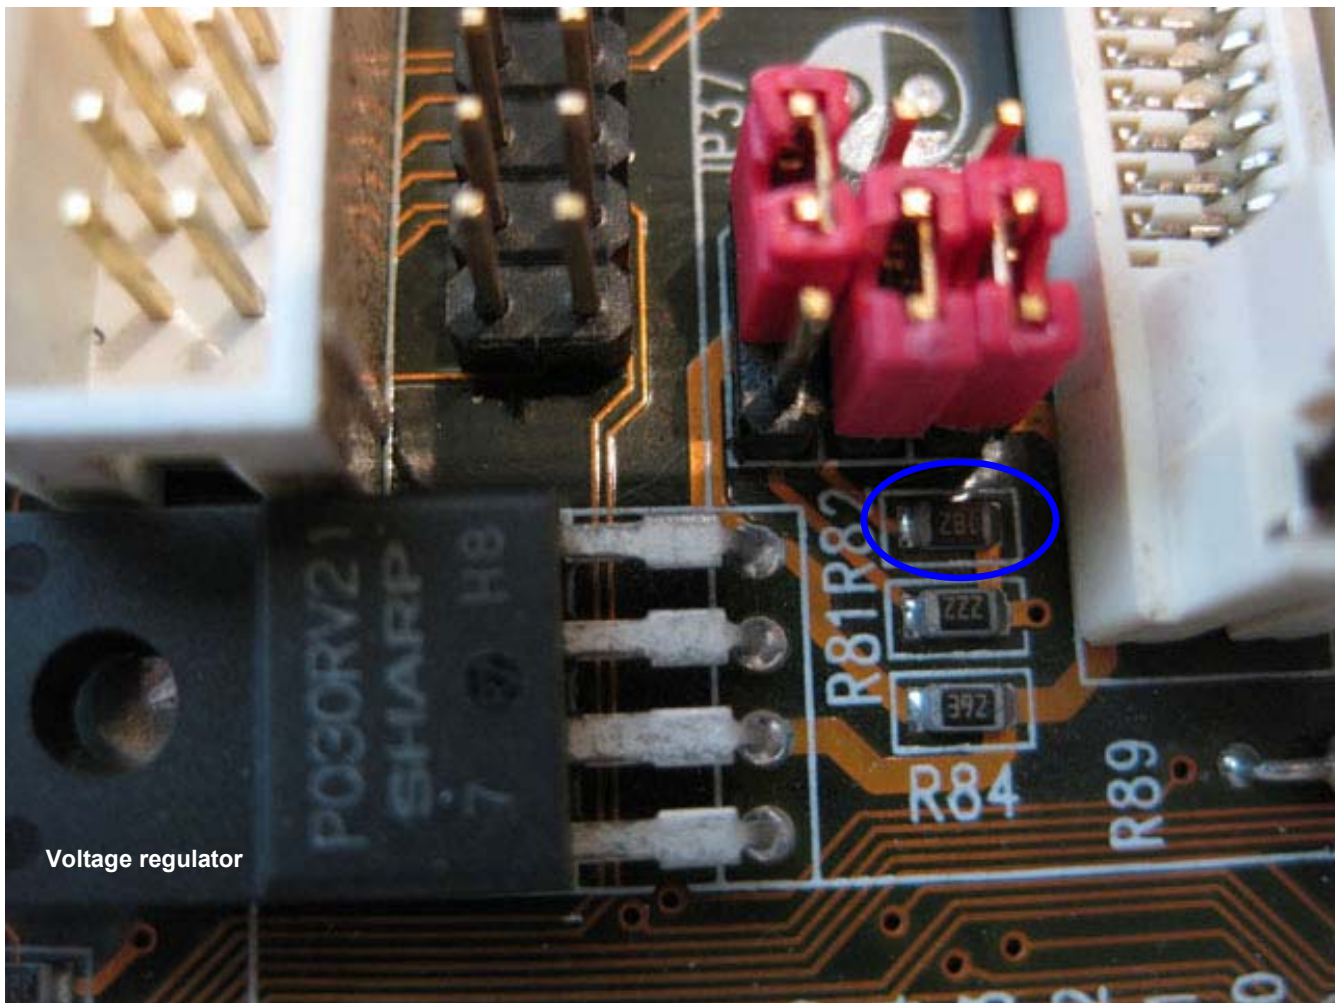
You will need to desolder the SMD resistor that has 182 printed on its face. Use a solder pump to suck out the old solder. This resistor is circled and has a resistance of 1.8 K Ω . The resistor below it with 222 (2.2 K Ω) controls the 3.45 V jumper setting. The resistor with 392 (3.9 K Ω) is R_1 in the above noted equation, while 182 and 222 make up two jumperable possibilities for R_2 .
